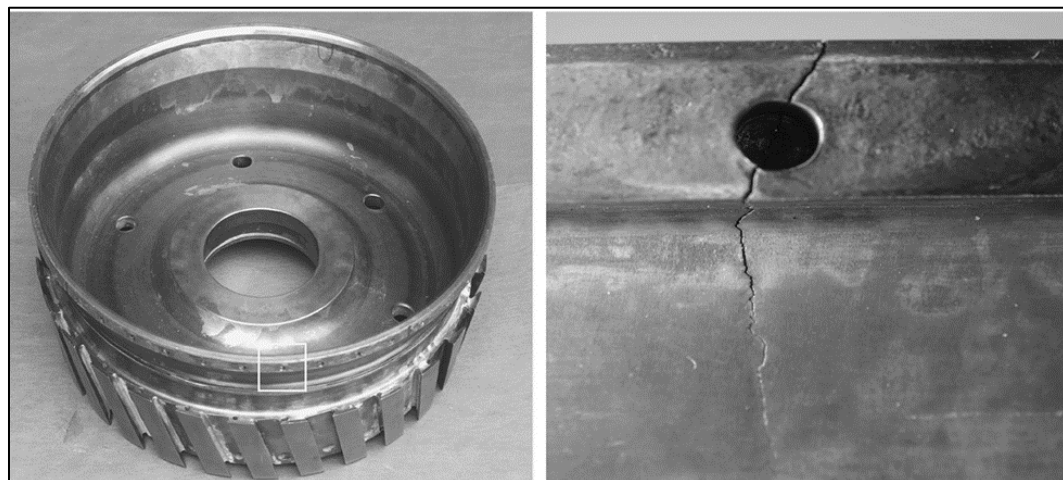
Schematic picture of a second stage compressor rotor drum and a progressed crack at the rivet hole surface (Bhaumik et al., 2008).
